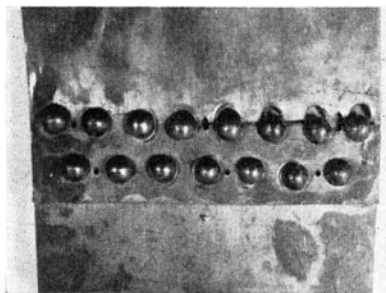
FAILURE BY SHEET TENSION; LAP JOINT WITH DOUBLE ROW OF RIVETS, STAGGER PATTERN, SPECIMEN E-97
